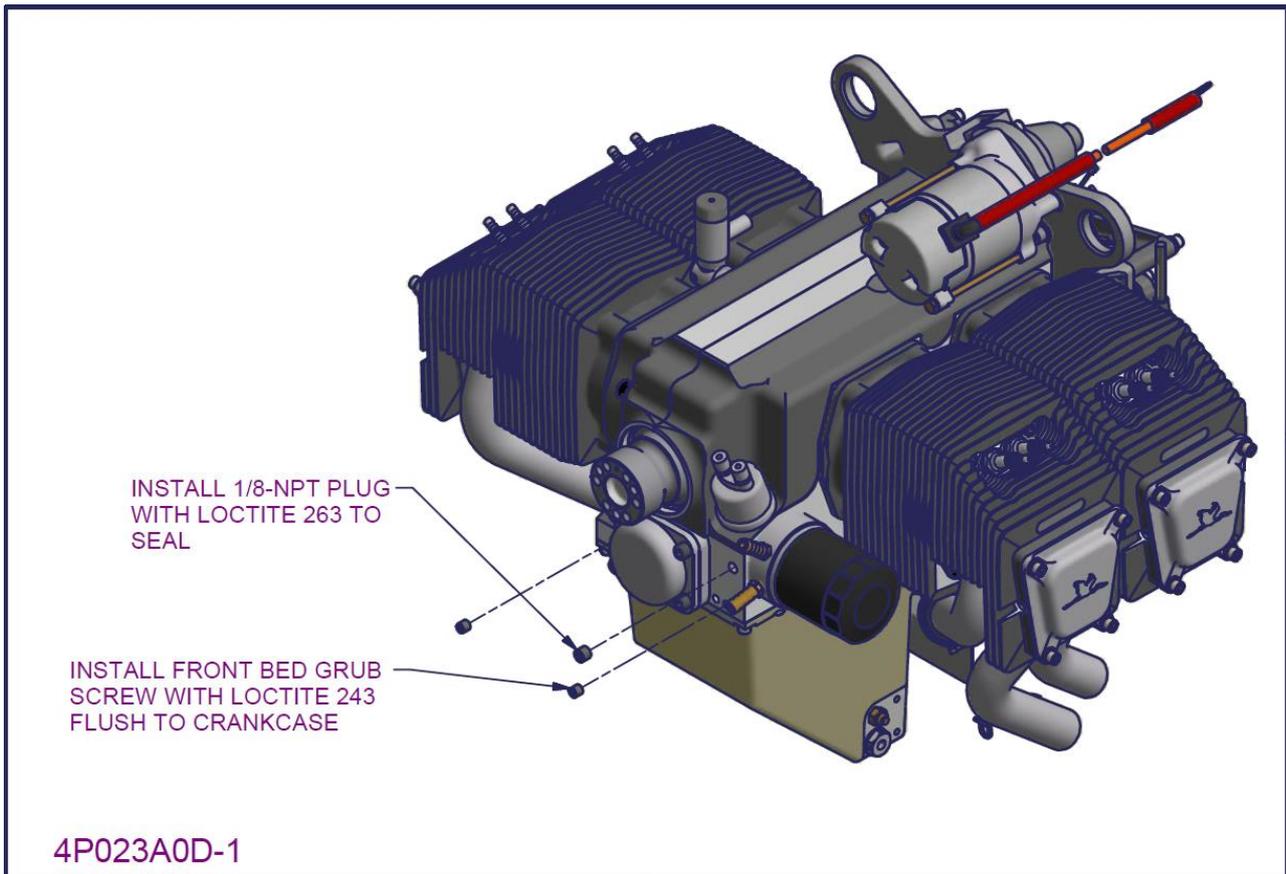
2200/3300 Front seal and propeller flange installation 1
